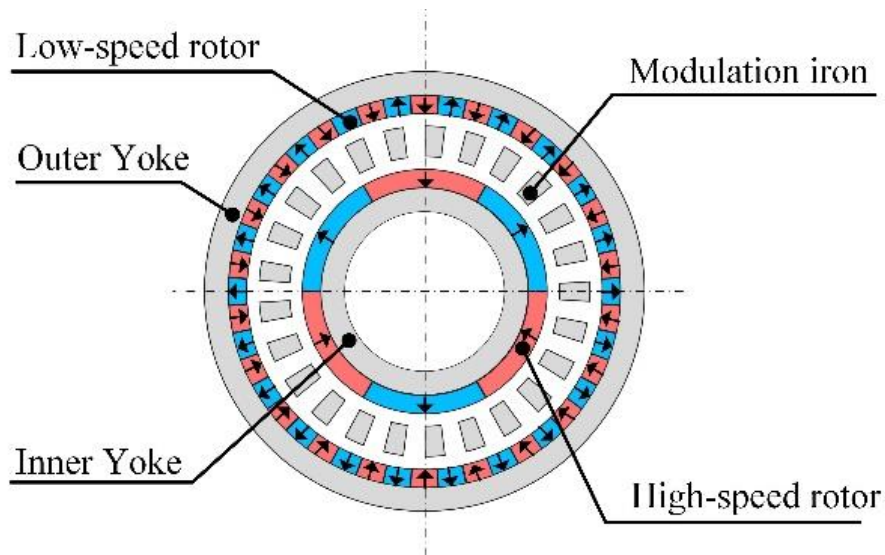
Two-dimensional structure of surface-mounted type permanent magnet (PM) coaxial magnetic gear.
